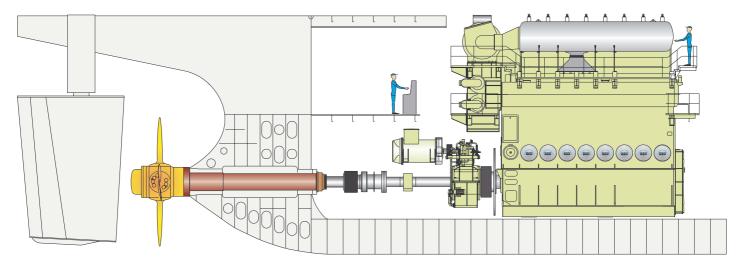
Propeller equipment type VBS - ODS (8S50MC-C engine, Renk tunnel gear, VBS1680 propeller)
